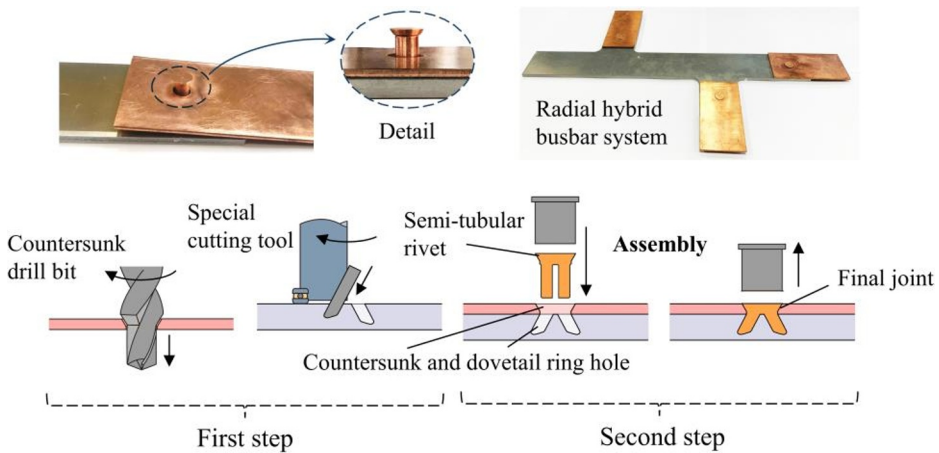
Schematic representation of the injection lap riveting (ILR) process utilized for assembling the different parts of the hybrid busbar distribution systems. A photograph detail shows one of these joints before and after assembly.
